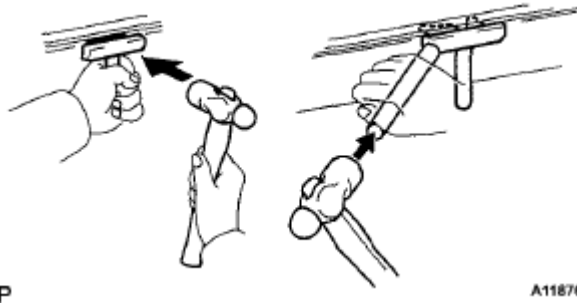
Inserting Blade Of Oil Pan Seal Cutter Between Oil Pan And Stiffening Crankcase
